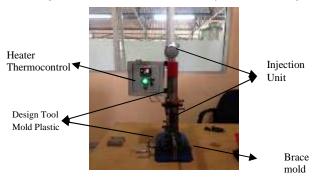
Design Tool Mold Waste Plastic Injection Molding
